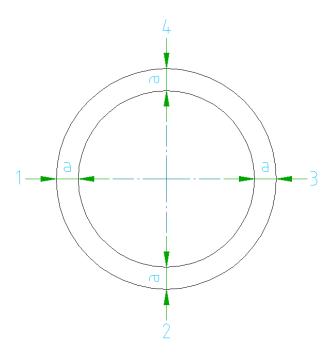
Concentricity of Cooler drum to Material discharge housing
